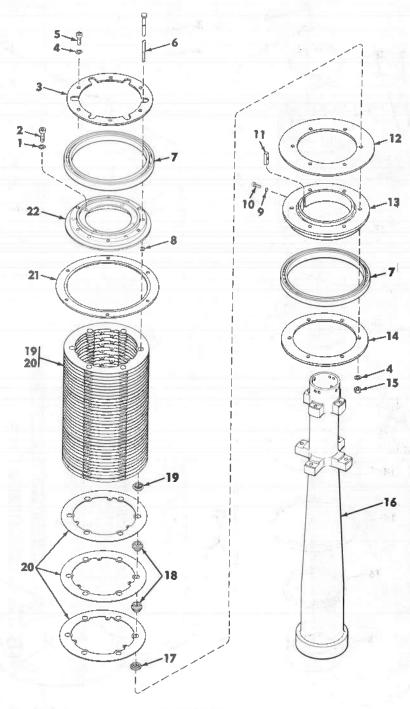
RING ASSEMBLY. ELECTRICAL CONTACT /9009416/-PARTIAL EXPLODED VIEW
